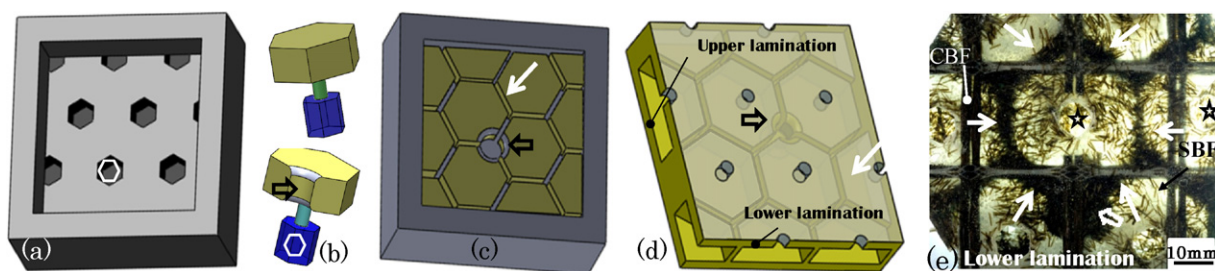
Molding tools developed for the integrated manufacturing of trabecula–honeycomb plates: (a) a female tool, (b) basic male tools, (c) assembly of the tools, (d) a schematic of the expected product, and (e) the bottom view of an example. \Rightarrow : a trabecula or the space used to form a trabecula, \rightarrow : a honeycomb wall or the space used to form a honeycomb wall, \bigcirc : either a positioning hole or a positioning block, \star : a processing hole; SBF denotes the short basalt fiber.
